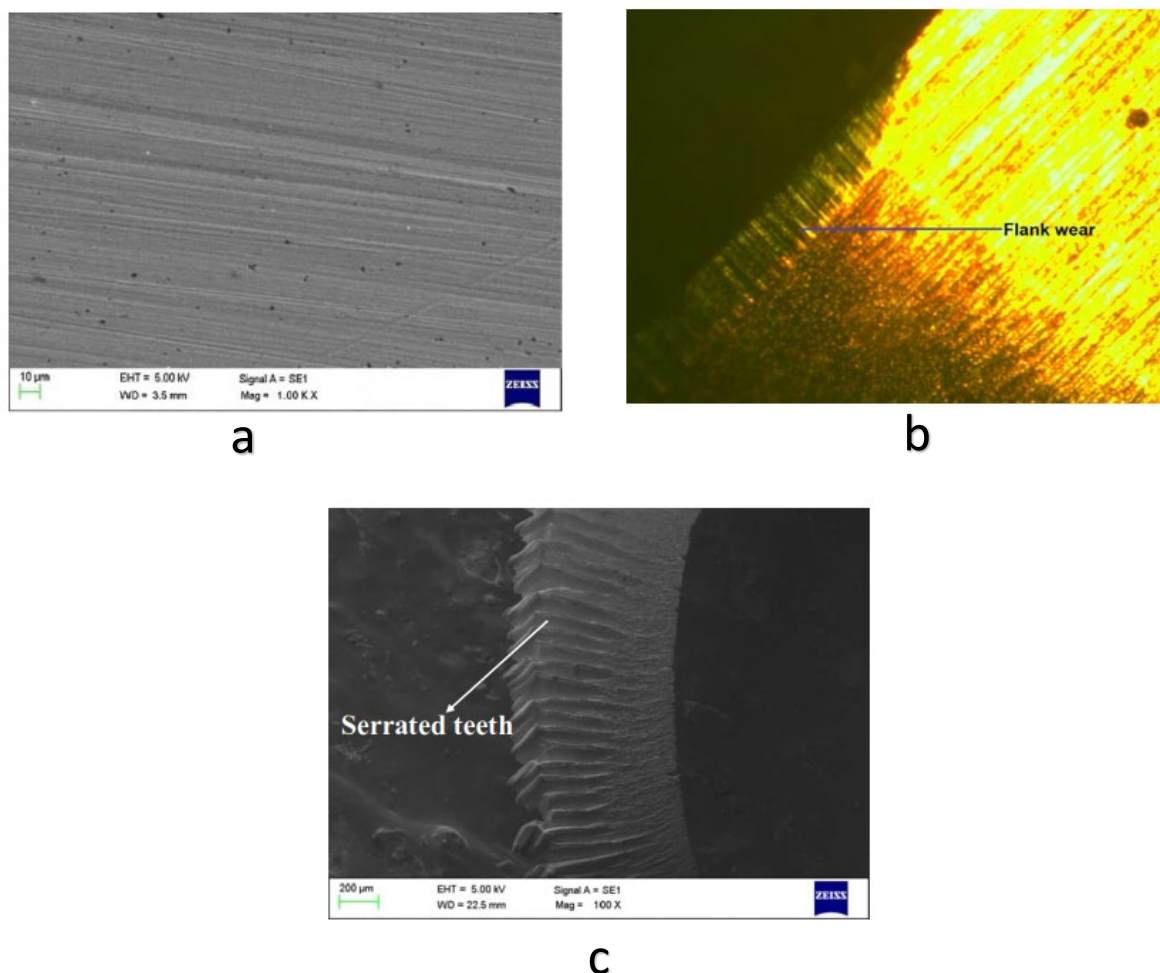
a) View of a machined surface using SEM [32] b) optical Image of flank wear in a CBN tool [32] c) SEM observation of chip morphology [32]
